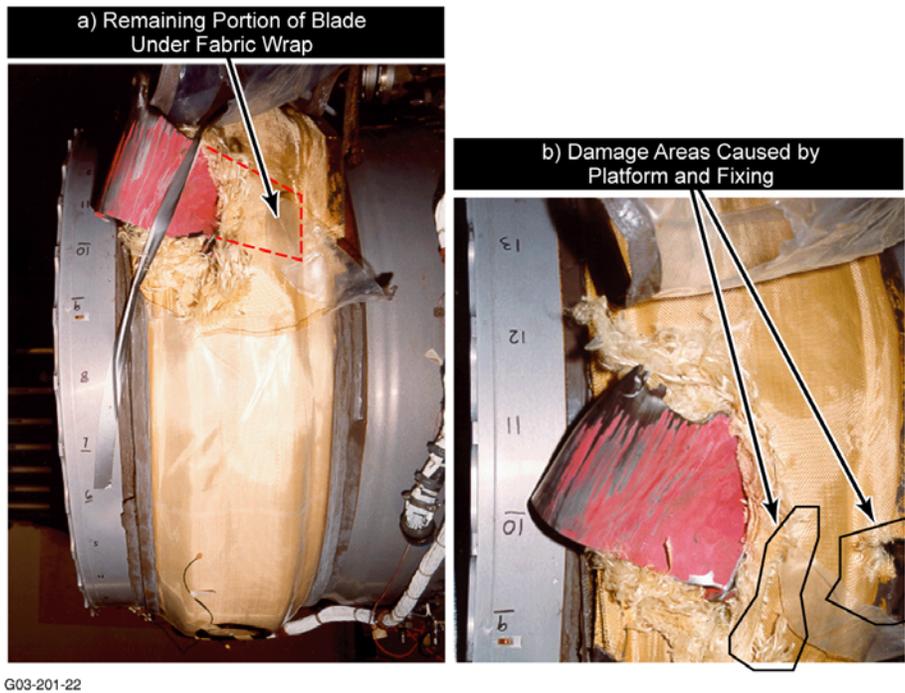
AS907 FAN CONTAINMENT HOUSING FOLLOWING BLADE-OUT TEST
